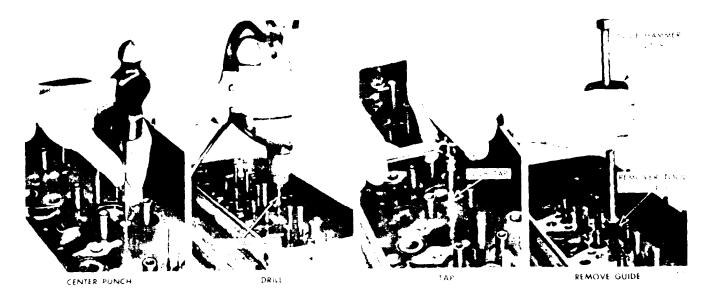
B-58. Removing Broken Exhaust Valve Bridge
